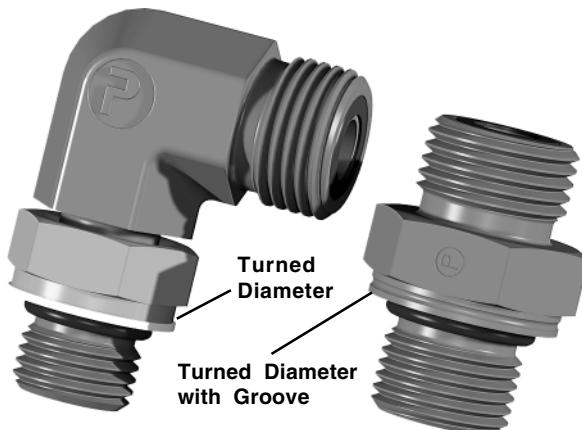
Metric Seal-Lok Straight and Shaped Connectors with Identification for use with ISO 6149-1 Port
